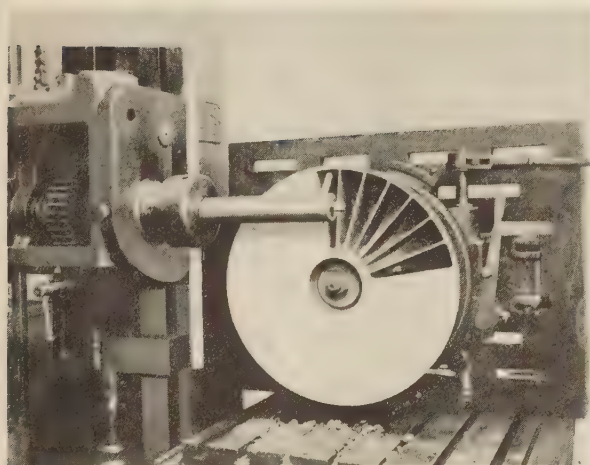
ROTATING MEMBERS OF HYDRAULIC COUPLINGS FOR HIGH-SPEED INSTALLATIONS ARE MACHINED FROM SOLID STEEL BLOCKS
